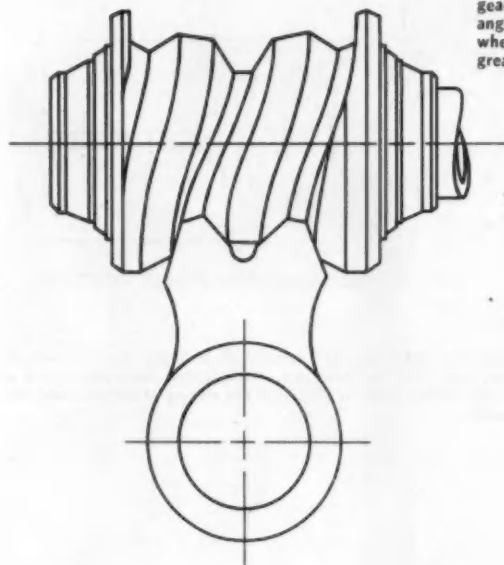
Hour-glass worm used in worm-and-sector gear had a greater helix-angle than worm and worm-wheel gear, with consequent greater efficiency.
